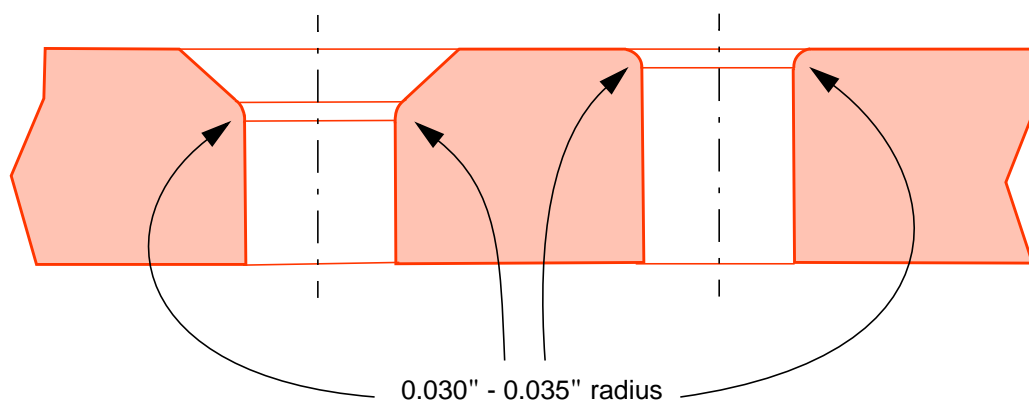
Radiusing of Hole Edges for Fastener Seating
